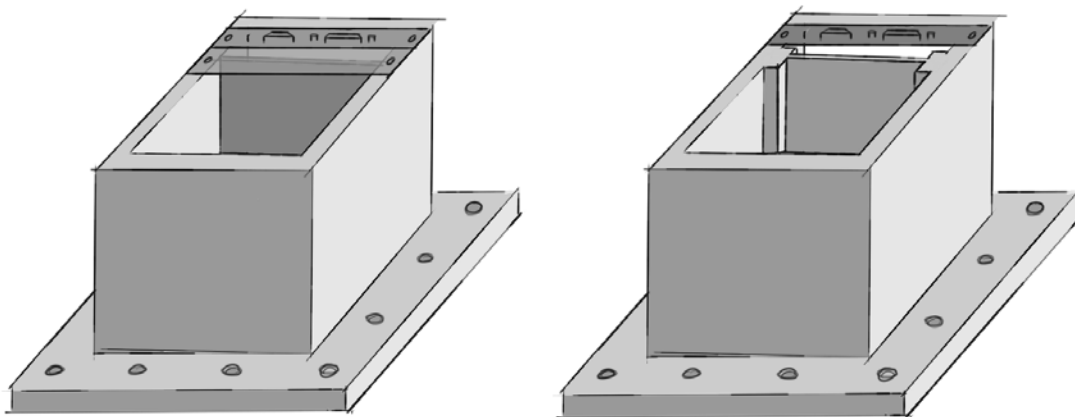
EMI shielding Integration: card based shielding and structure-integrated shielding.
